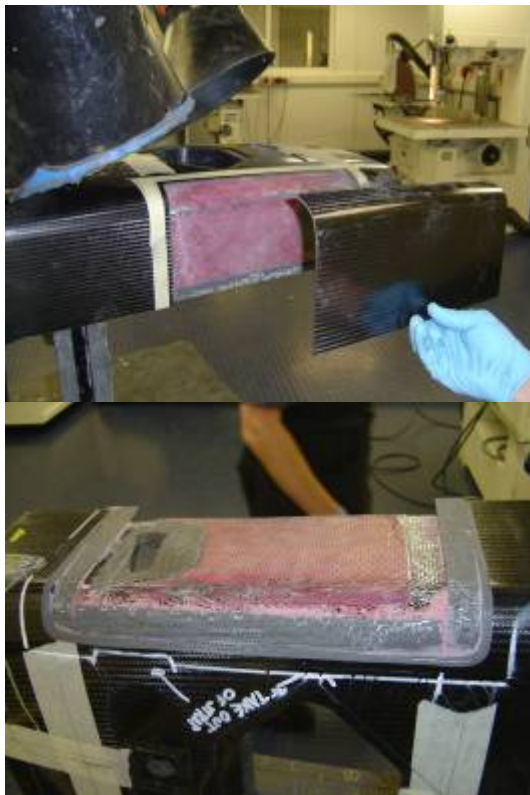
Repair of the upper section of the chassis using a scarfed patch.
